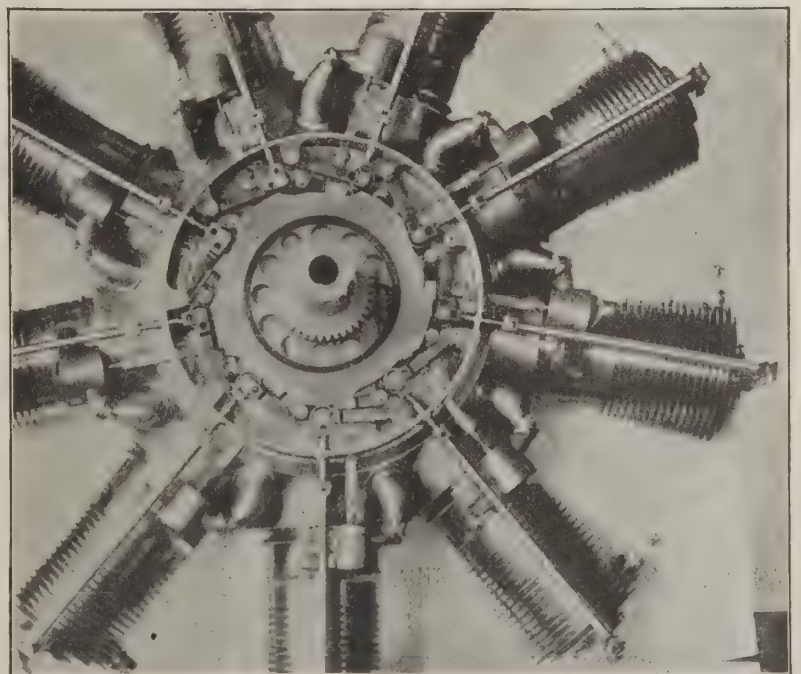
The Five-Pointed Cam and Valve Mechanism of one of the Early Nine-Cylinder Gyro-Duplex Engines
